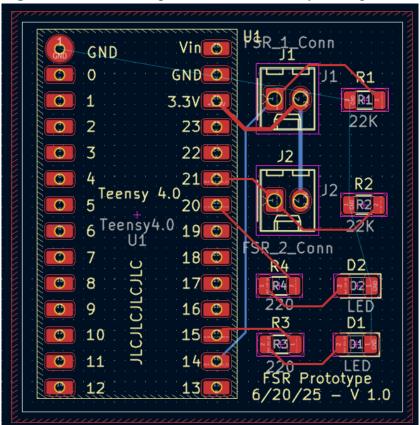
FSR Prototype PCB Sketch with Traces and Components
